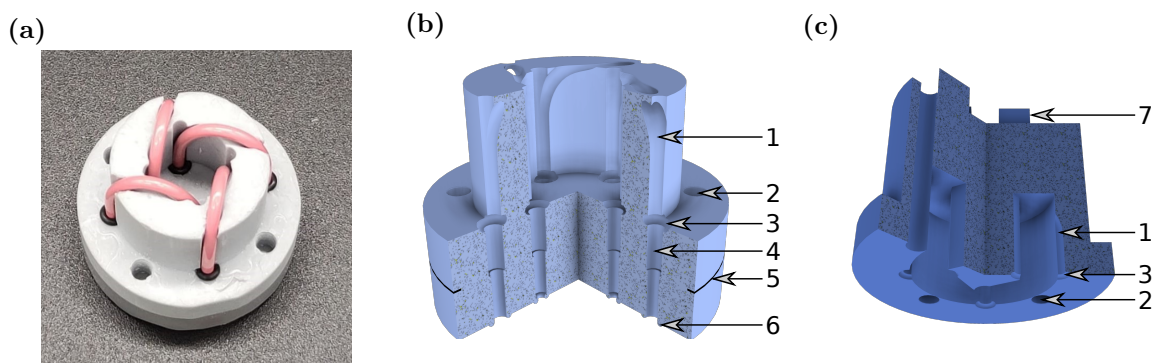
(a) 3D-printed rotor (part 1) with inserted capillaries. (b) Section view of rotor part 1 CAD; (c) section view of rotor part 2 CAD. 1 – Guide structure for capillaries; 2 – bore for securing rotor part 1 and 2; 3 – O-ring groove; 4 – capillary holder; 5 – height of material change; 6 – O-ring like structures for sealing the rotor-stator interface; 7 – adapter for motor coupling.
